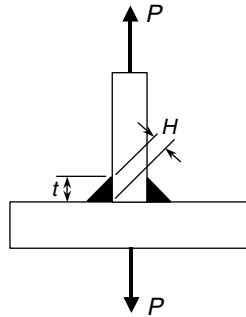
Fillet welds in a transverse joint.
